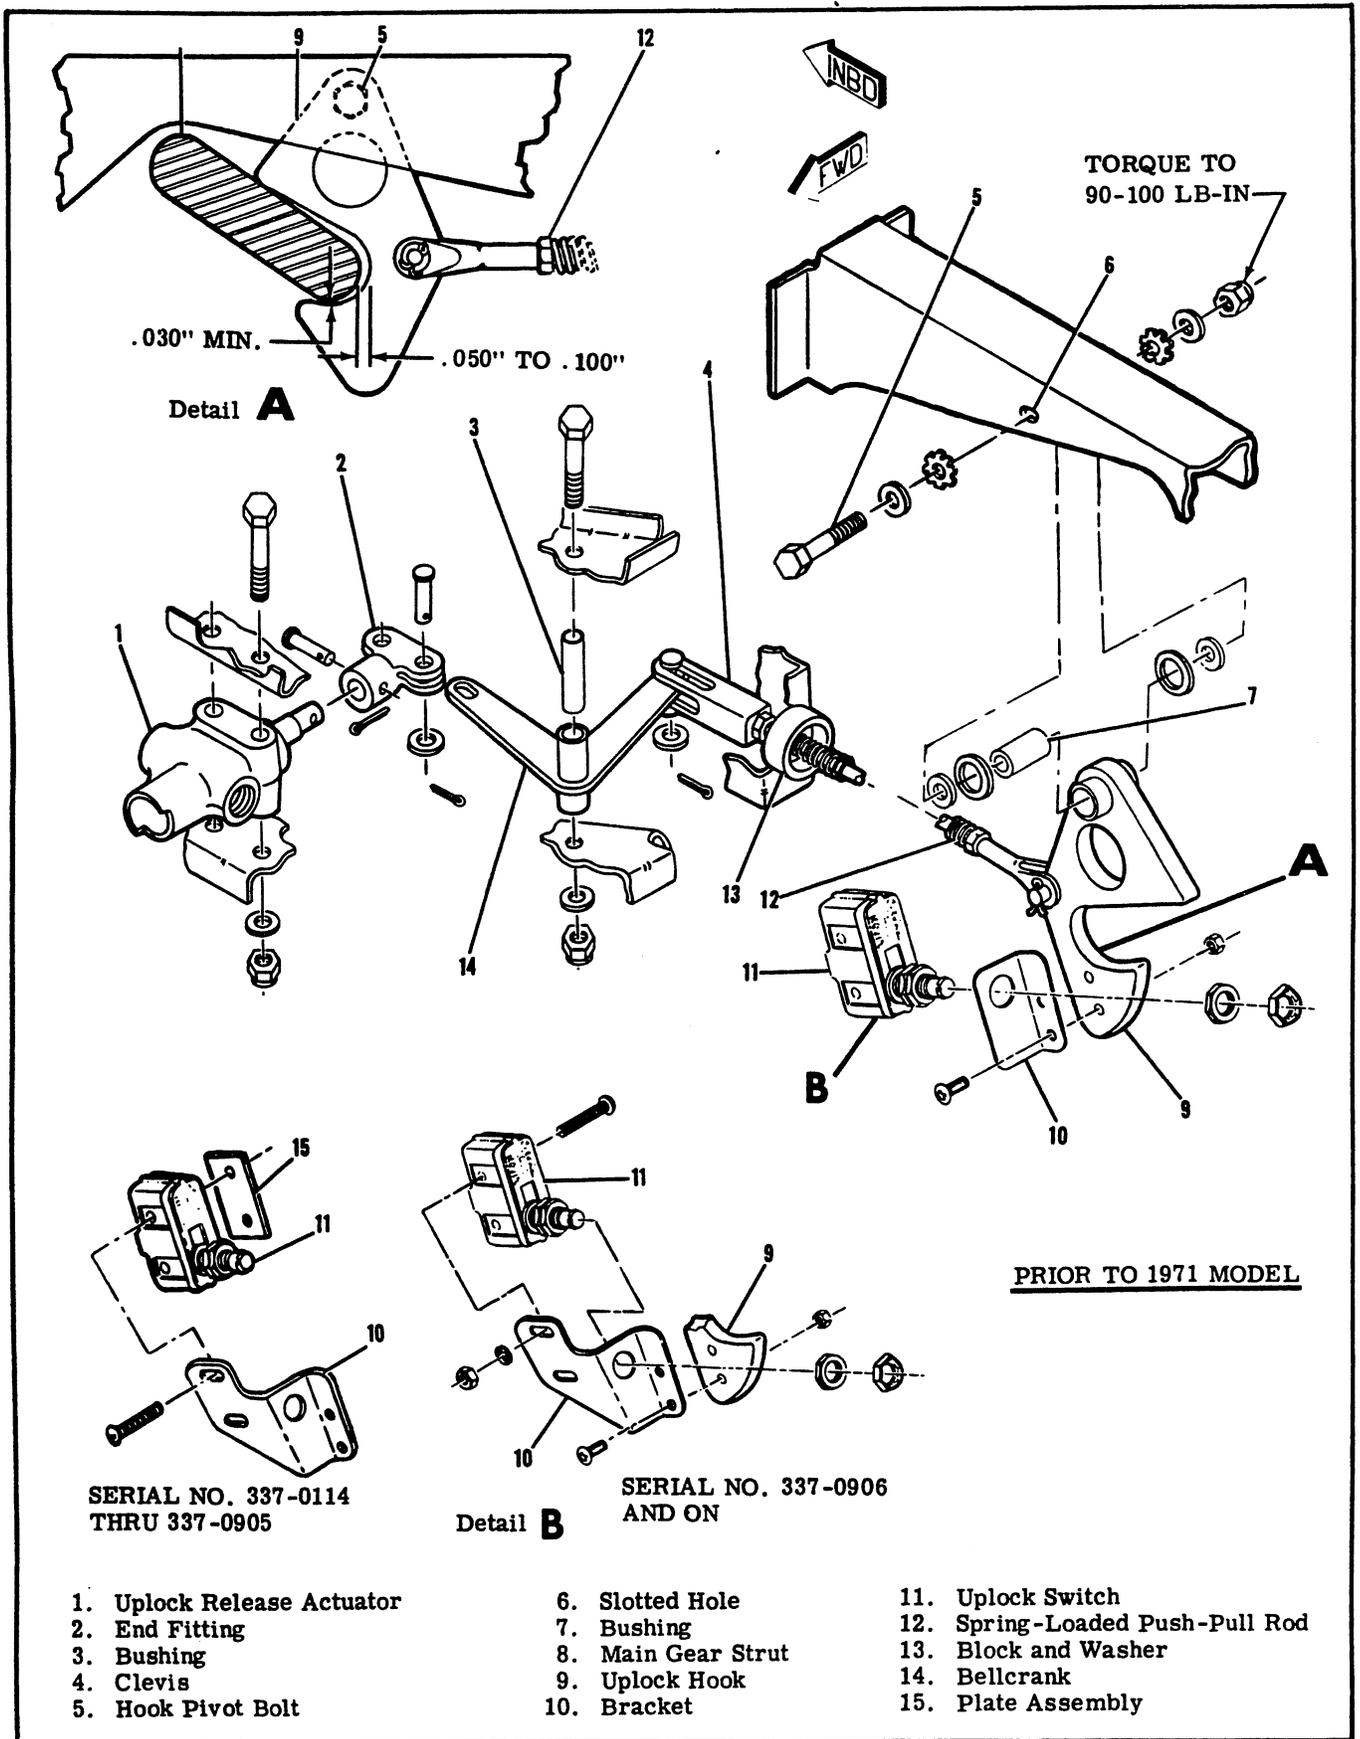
Main Gear Uplock Installation (Sheet 1 of 2)
